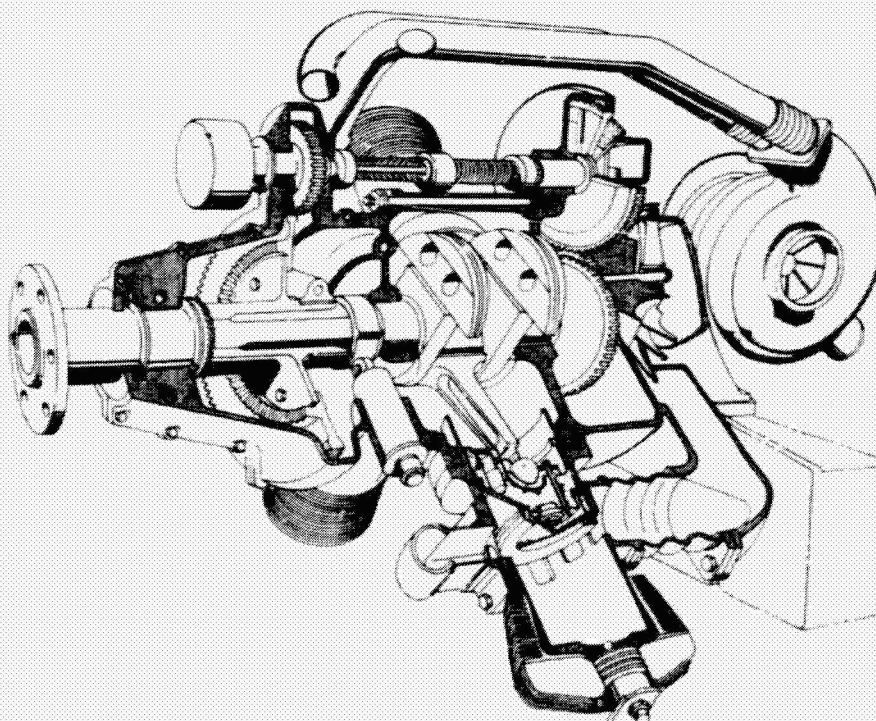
149AW, 4-CYLINDER DIESEL AIRCRAFT ENGINE
